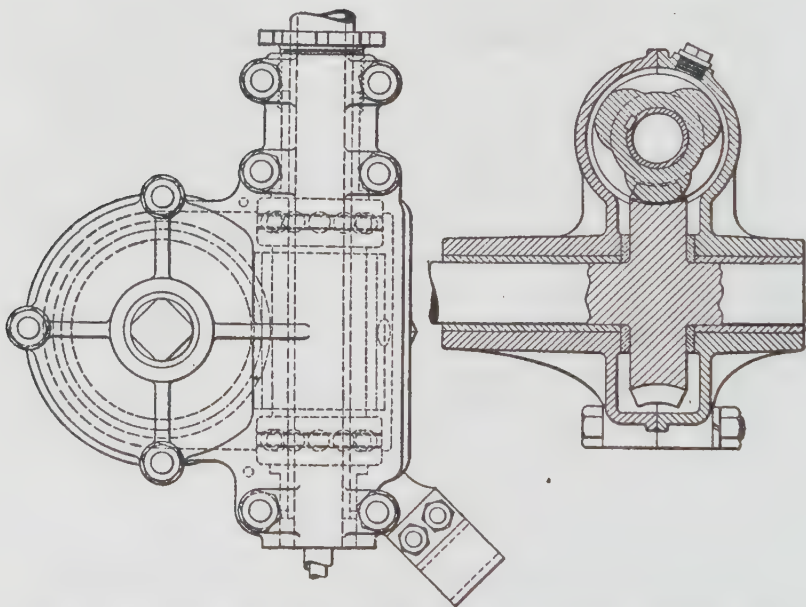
WORM AND WHEEL STEERING MECHANISM WITH VERTICALLY DIVIDED CASING.
